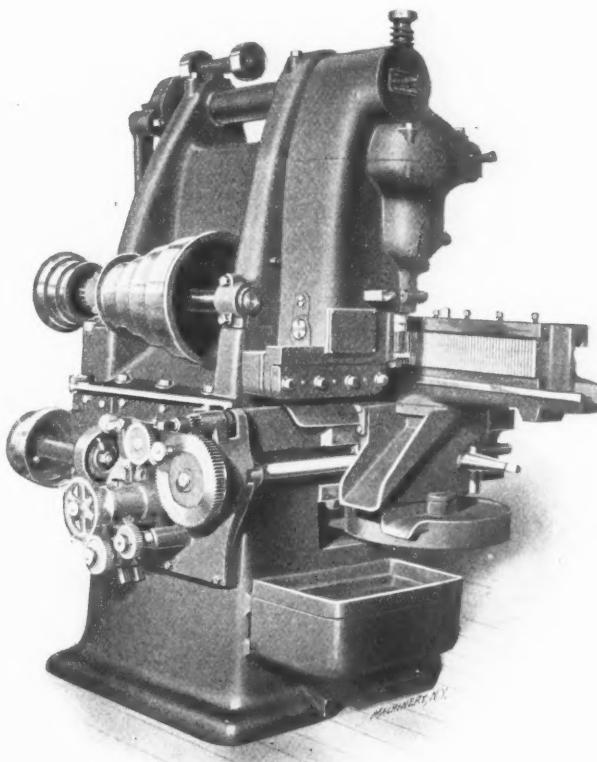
The Fellows Gear Shaper, with Rack-cutting Attachment.
